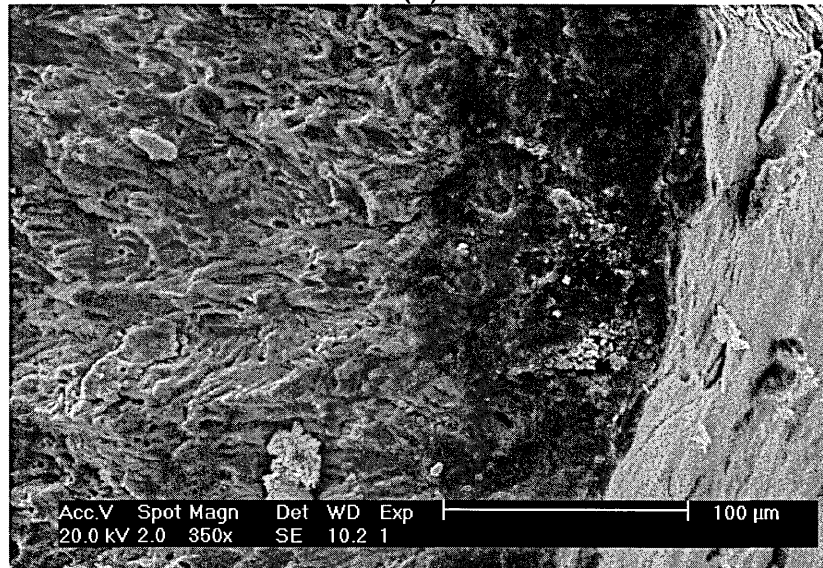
Specimen#25-Fracture Surface (1 to 3 microns)
